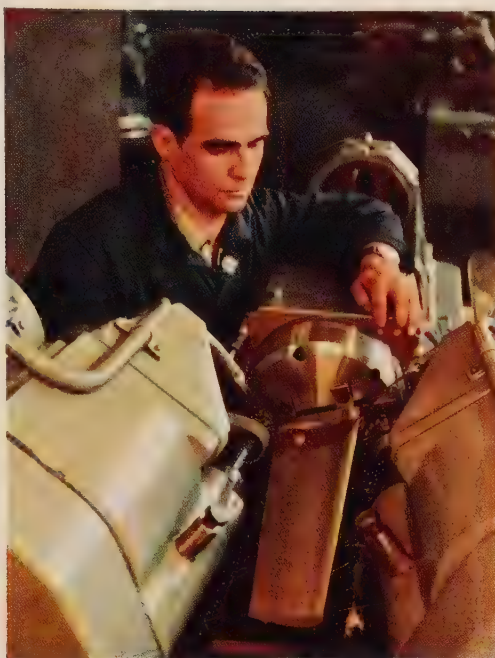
Complicated blades for steam and gas turbines are manufactured on electro-hydraulically controlled milling machines which were developed by Siemens specially for the job and operate on the tracer copying principle. From a model, these machines can reproduce the profiles and blade lengths to any scale, larger or smaller, this being completed in one operation
